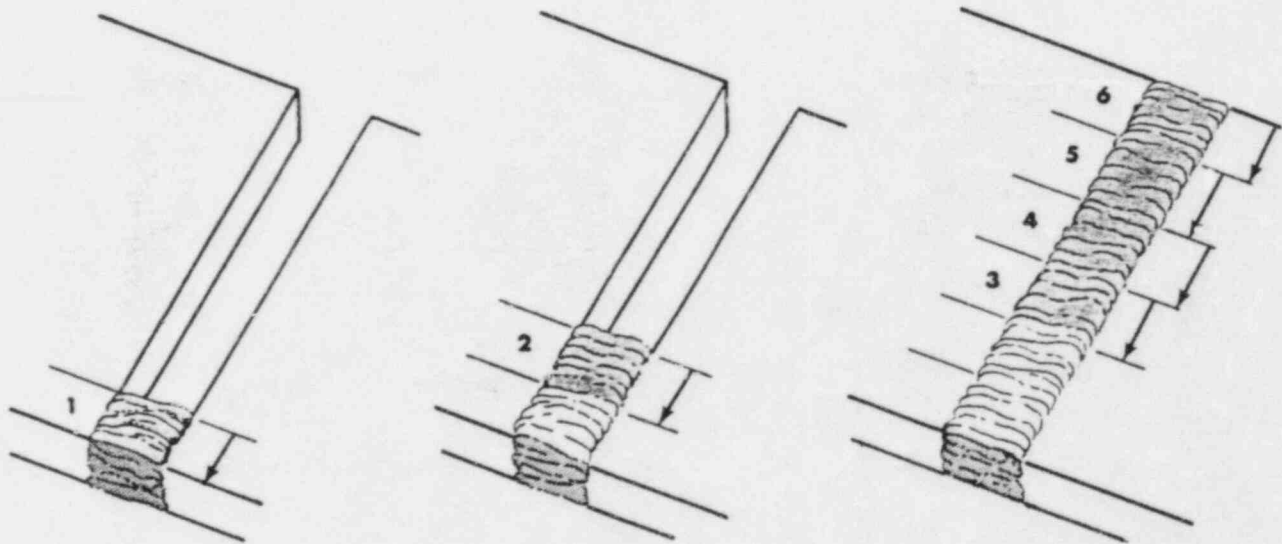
This is how the back-step welding technique is done.
